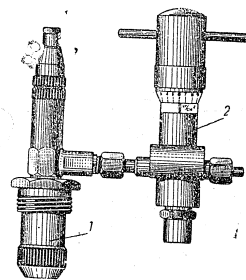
Checking Fuel Injection Pressure by Maximum Pressure Gauge:
